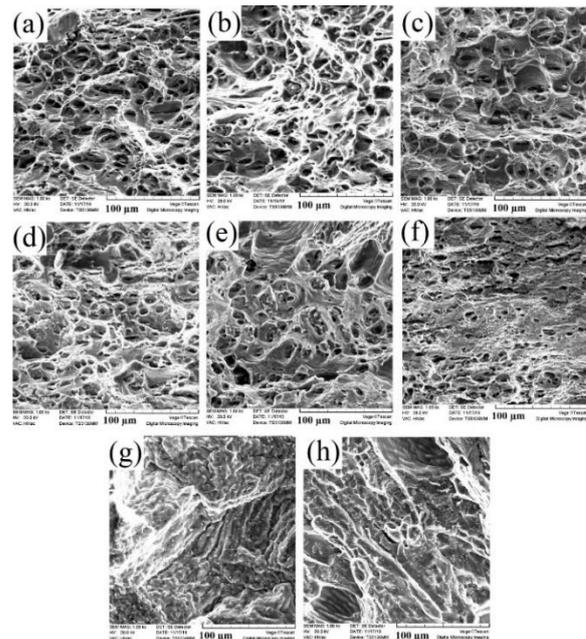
SEM micrographs of fracture surfaces for tensile tested (a) raw material (b) flux-free welded specimen (c) 2.5% SiO_2 active flux welded specimen, (d) 7.5% SiO_2 active flux welded specimen, (e) 10% SiO_2 active flux welded specimen, (f) 2.5% TiO_2 active flux welded specimen, (g) 7.5% TiO_2 active flux welded specimen, (h) 10% TiO_2 active flux welded specimens
